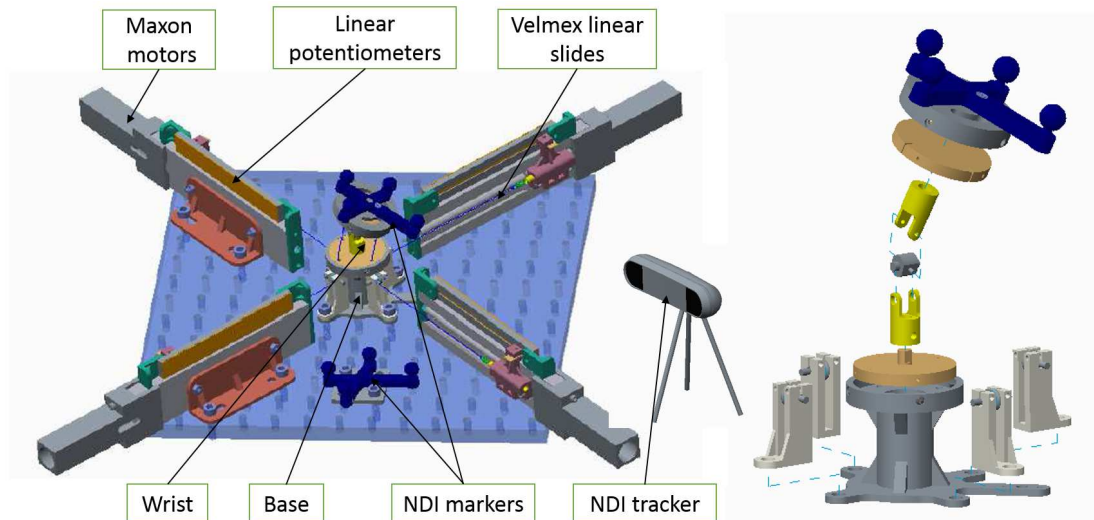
Creo Models of assembly for experiment setup (left) and exploded view of wire-actuated wrist with universal joint (right)
